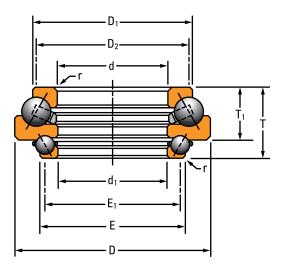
Type DTVL angular contact thrust ball bearing assembly.
